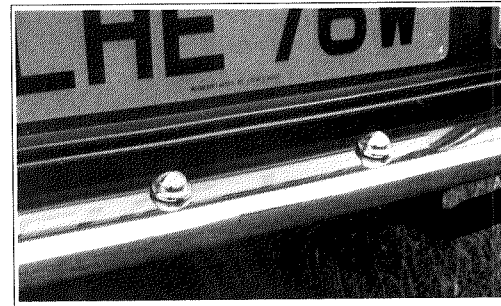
The cheaper number plate lights fitted after FH 116000. The change caused a change in rear bumper part number due to the different fixing holes required.
